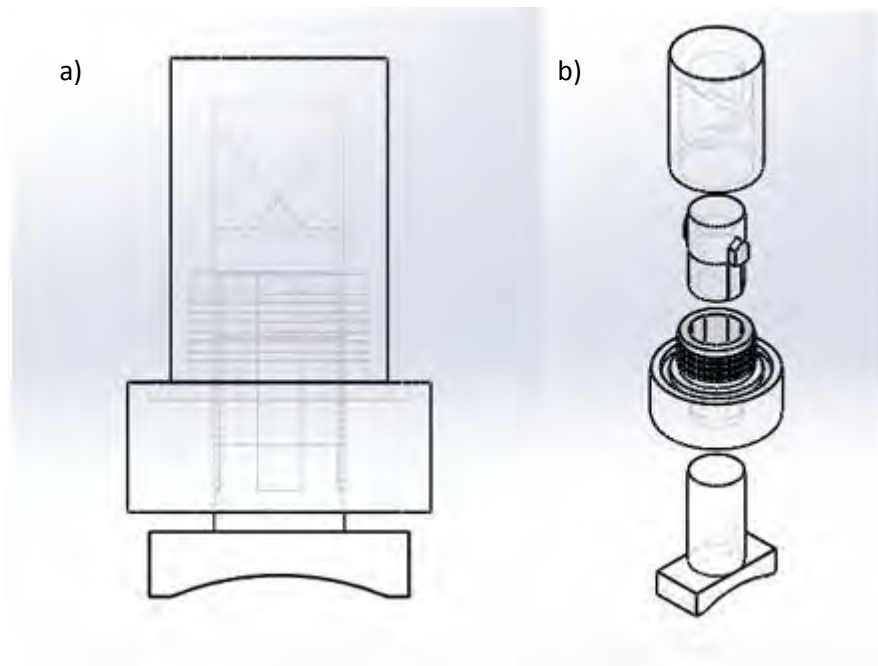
The position-lock mechanism components. a) shows the assembly whilst b) shows the exploded view
